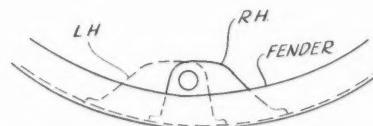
Welding fastening lug to rear fender, rights and lefts without change in set-up
